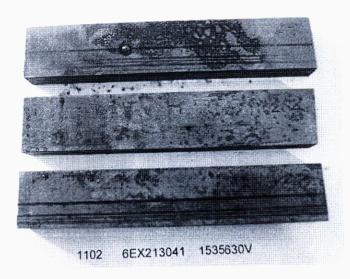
Morphology of the specimen surface 图 2 试样表面形貌图
